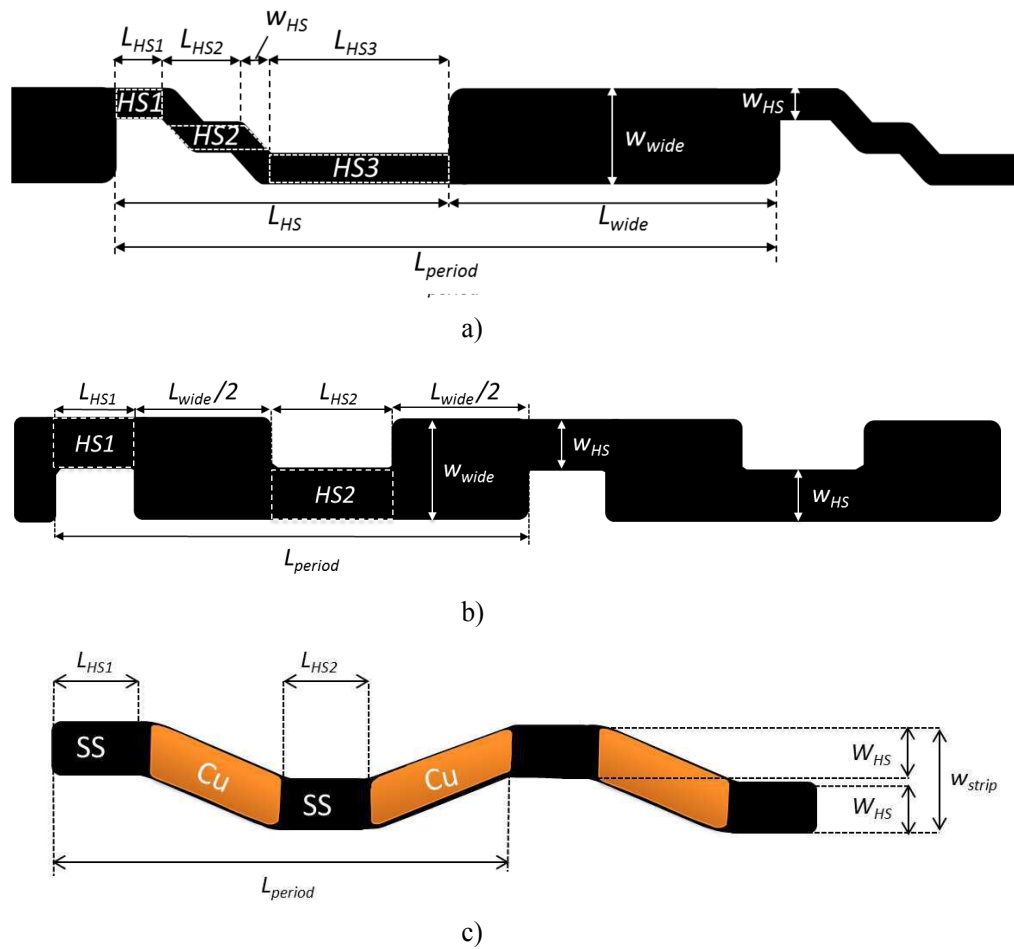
Proposed protection heater strip geometry concepts: a) stair-step, b) pulse-wave and c) snake layout.
